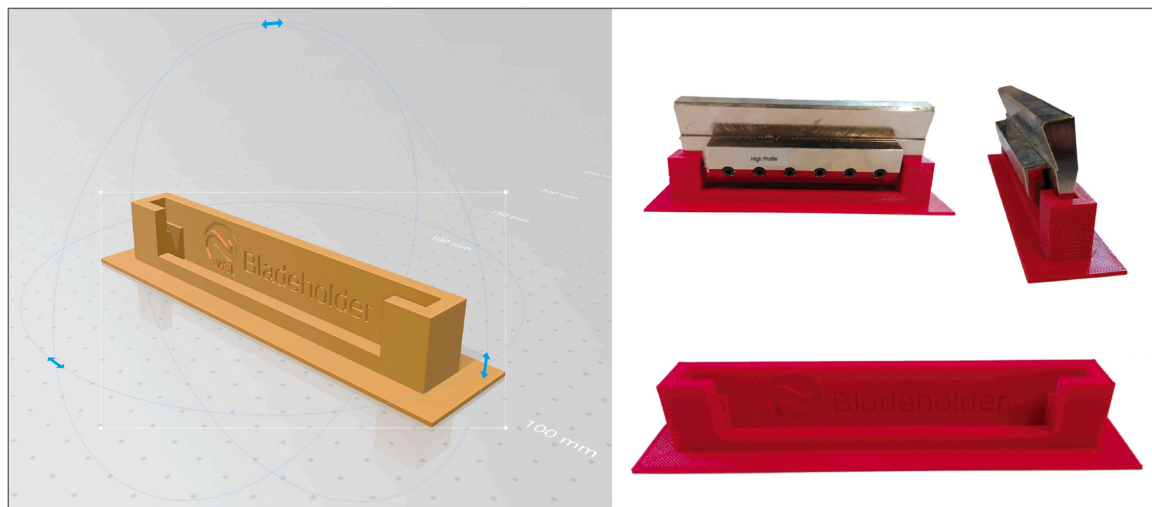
3D model of the storage frame (left) and the printed version with and without blade holder (right).
